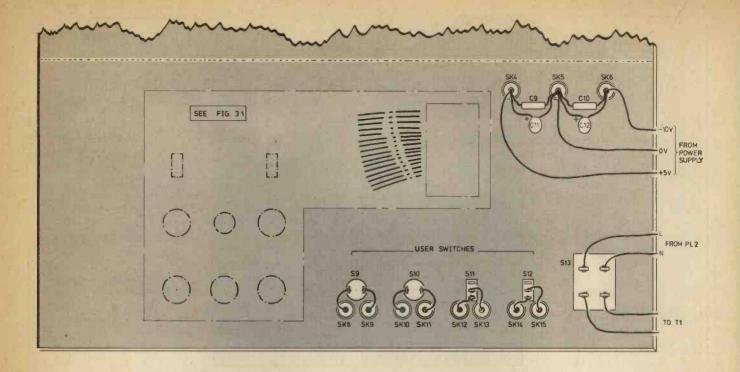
Rear view of front panel wiring. A 16-way connector (d.i.l. socket in the prototype) enables all leads from the CHAMP board to be disconnected at once. Details given match Doram type pushbutton switches
